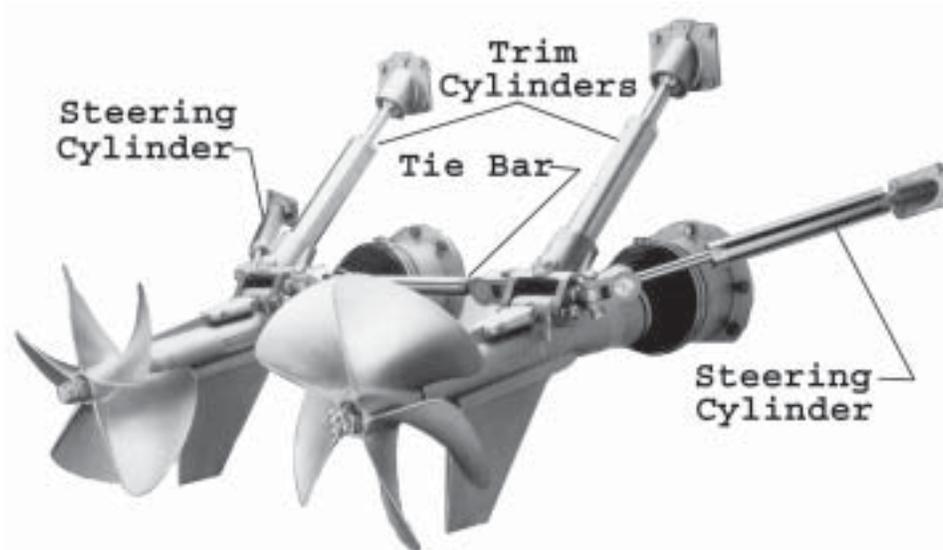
Rear View of Dual Installation Showing Cylinders and Tie Bar
